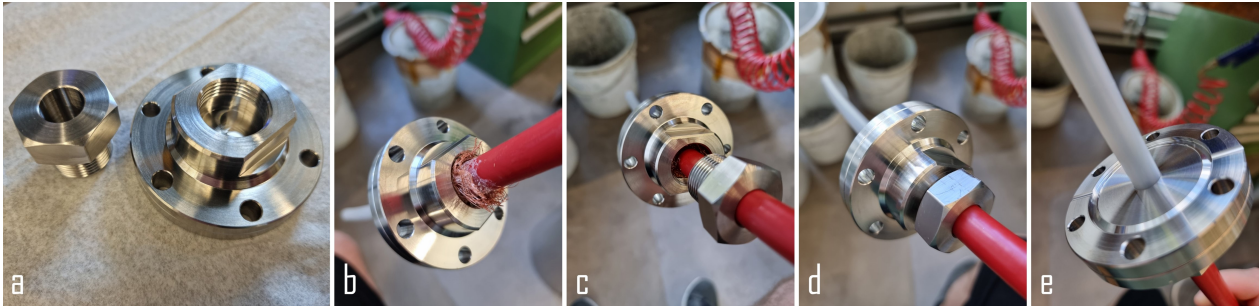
HV cable cryfitting process. From left to right: (a) Custom DN40CF flange and grounding screw. (b) Frozen cable inserted in the flange. (c-d) Grounding screw secured to the flange, pinching the copper braid. (e) Finished cryofitted air-to-vacuum HV feedthrough.
